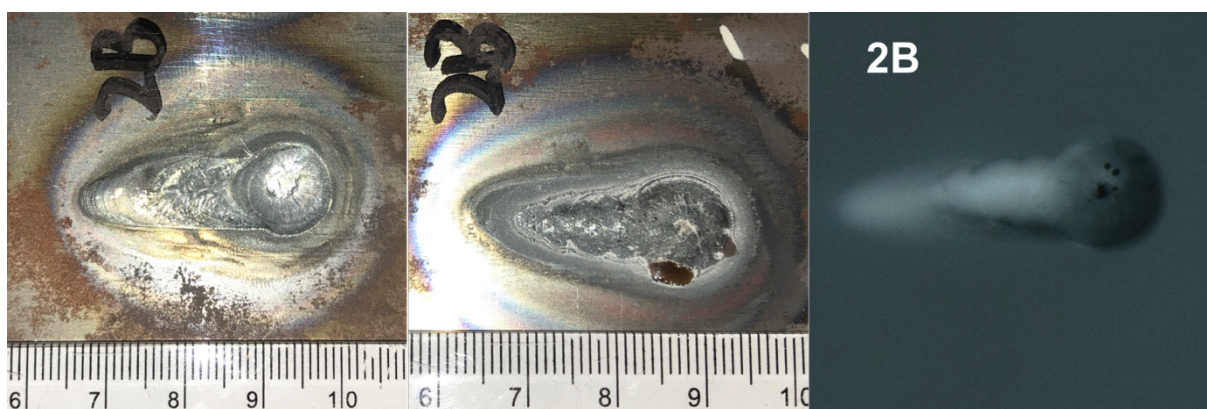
Photos of weld cap/ root of trial 2B and radiographic inspection result.
